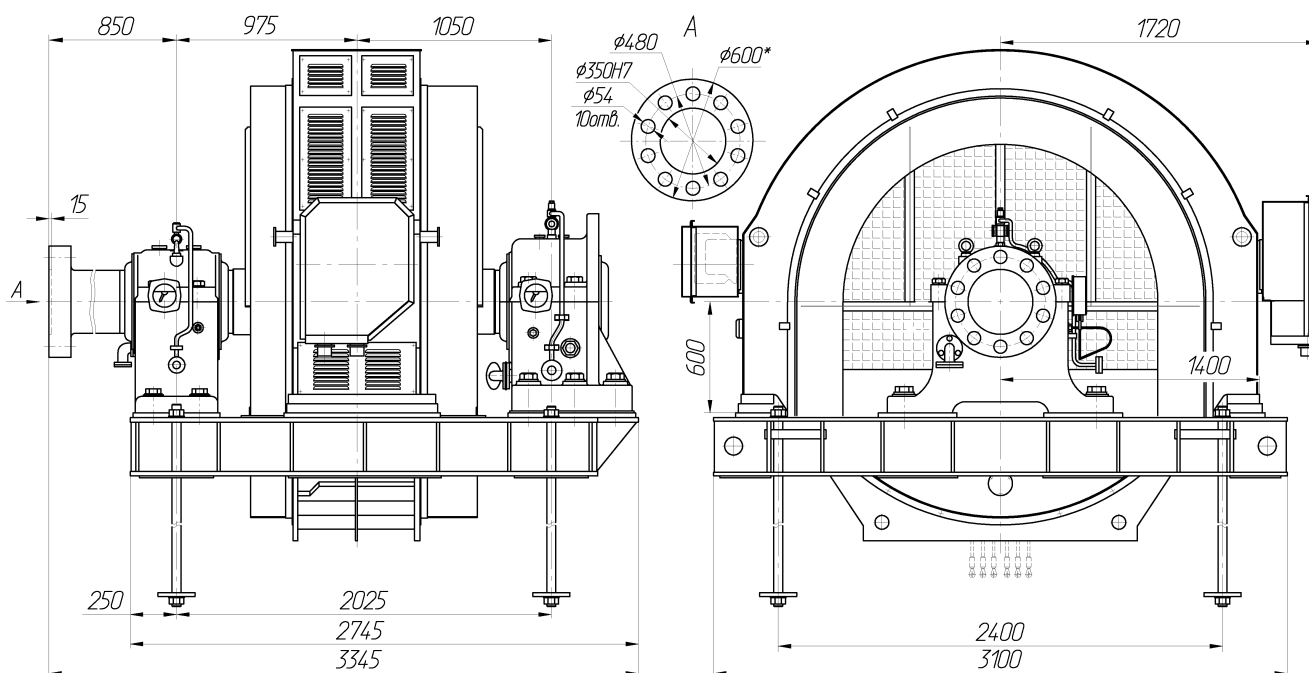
Electric motors CD4-3150-16 (IM 7315, with flange shaft end).
